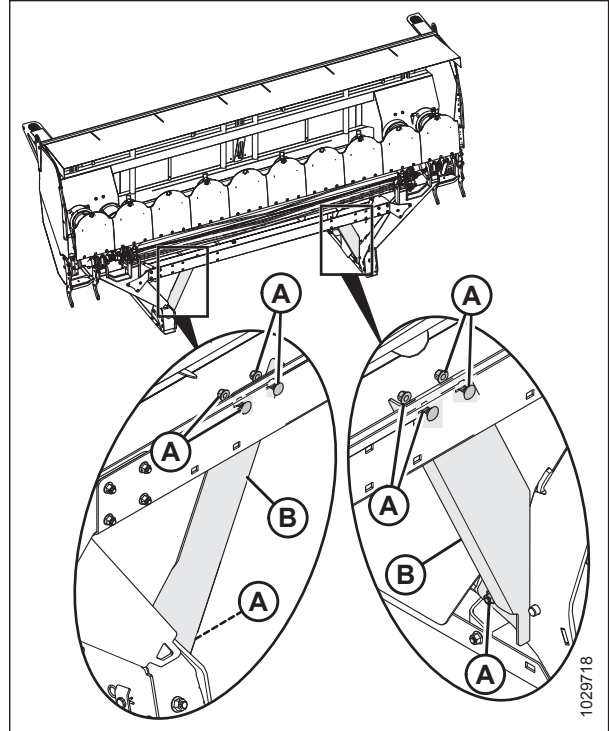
Shipping Stand Brace – Right Side Shown, Left Side Opposite
